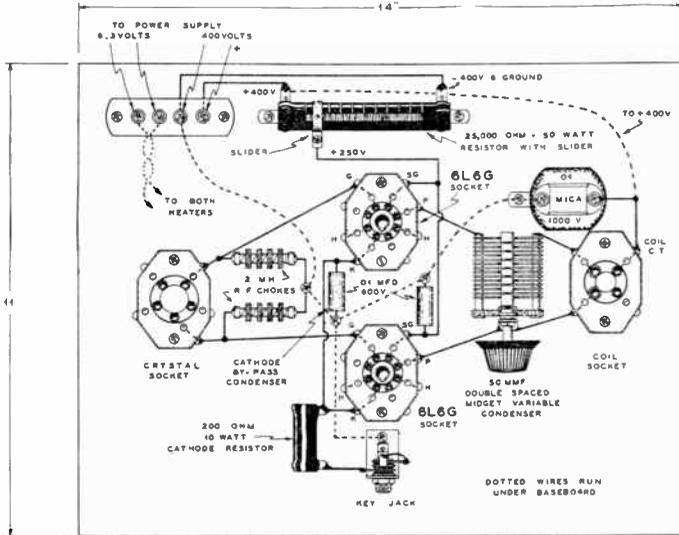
Pictorial Wiring Diagram, Showing Placement of Parts on the Baseboard.
